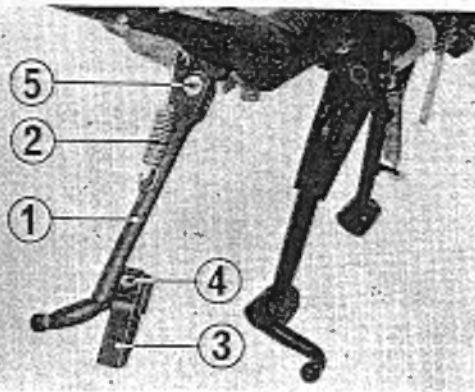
① Side stand bar ④ 6mm bolt
